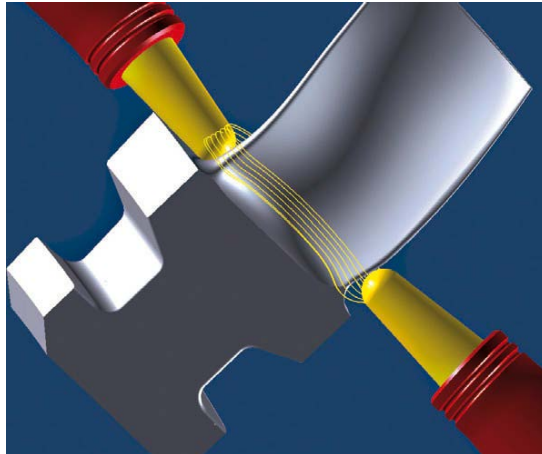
Rolling milling of turbine blades5 axes[14]
